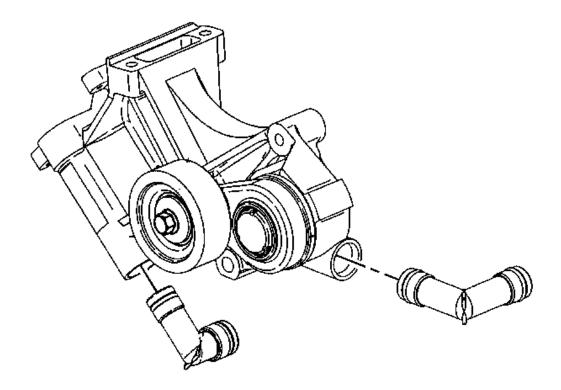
View Of Drive Belt Tensioner Courtesy of GENERAL MOTORS CORP.
